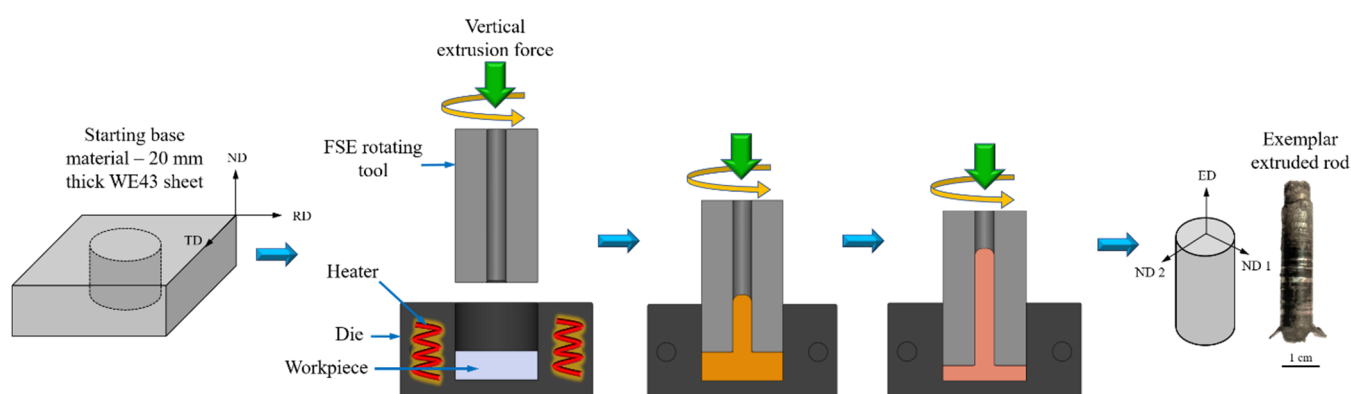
A schematic of the friction stir extrusion process showing tool and die with a heating coil. An example extruded WE43 Mg alloy rod of 1 cm diameter is also shown.
